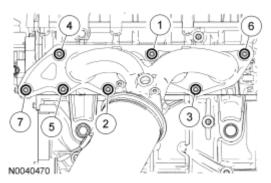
Identifying Catalytic Converter Manifold Nuts Tightening Sequence Courtesy of FORD MOTOR CO.
